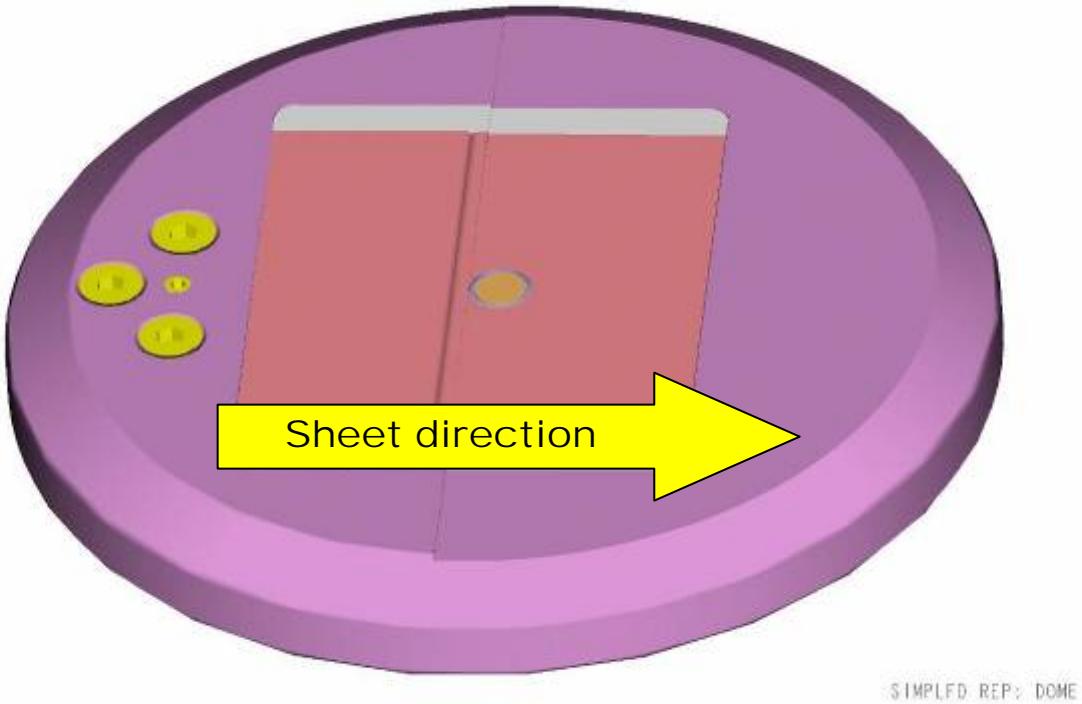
Air clamp module installed with step upstream of measurement hole
